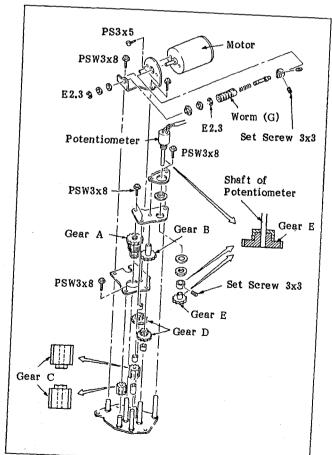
Replacing the Components of the Gear Box Assembly
